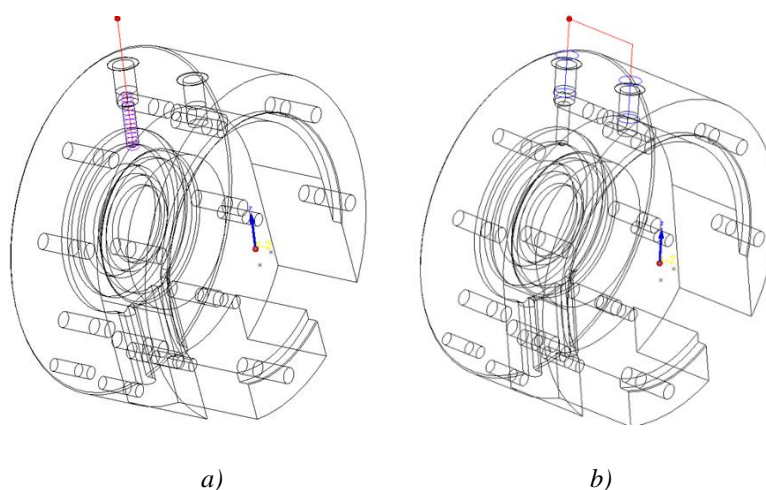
Toolpath for drilling operation (a) Rest material after holes drilling (b) Rest material after holes drilling
